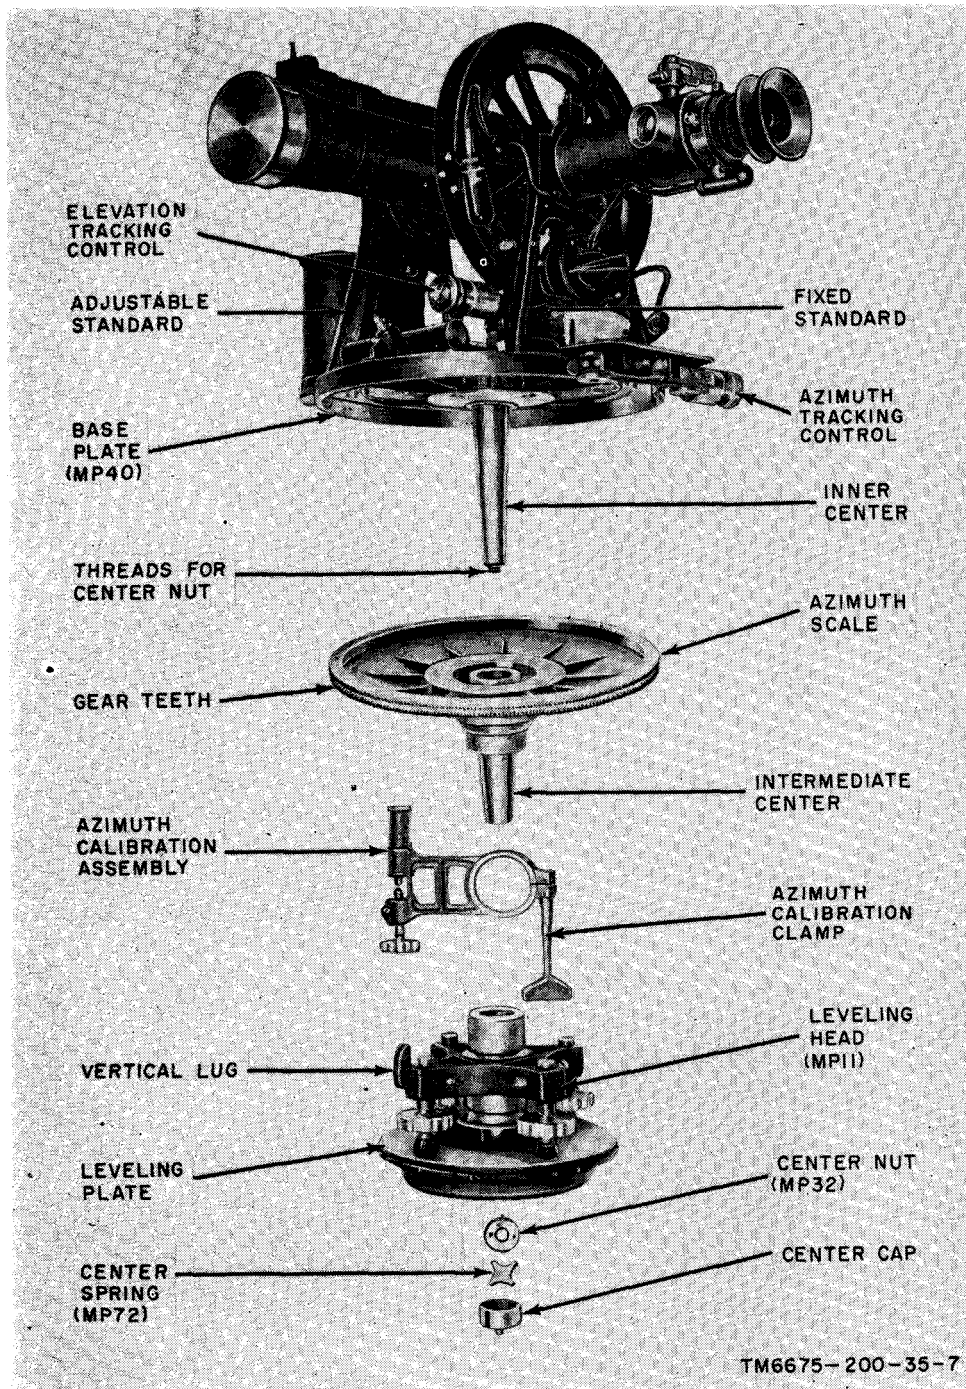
Partial disassembly of theodolite to reveal internal bearing surfaces.
